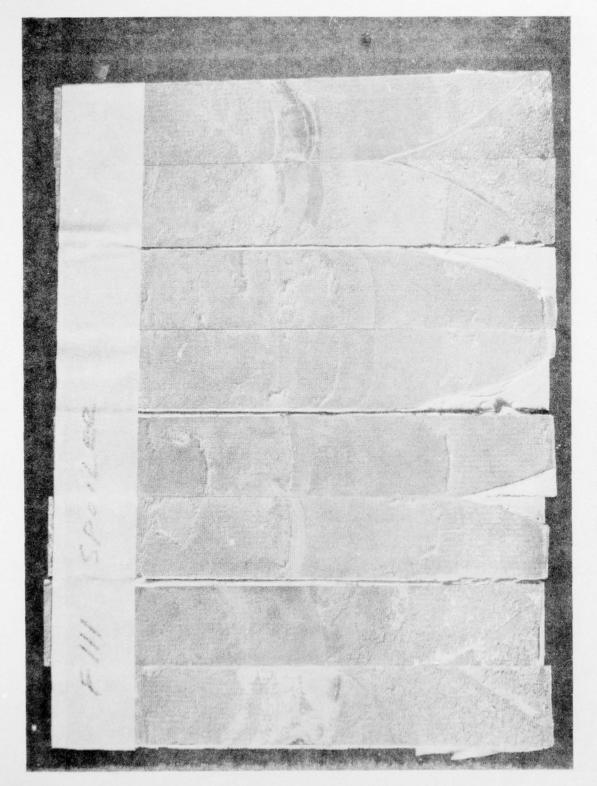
Failure Surfaces of Wedge Specimens From the F-111 Spoiler
